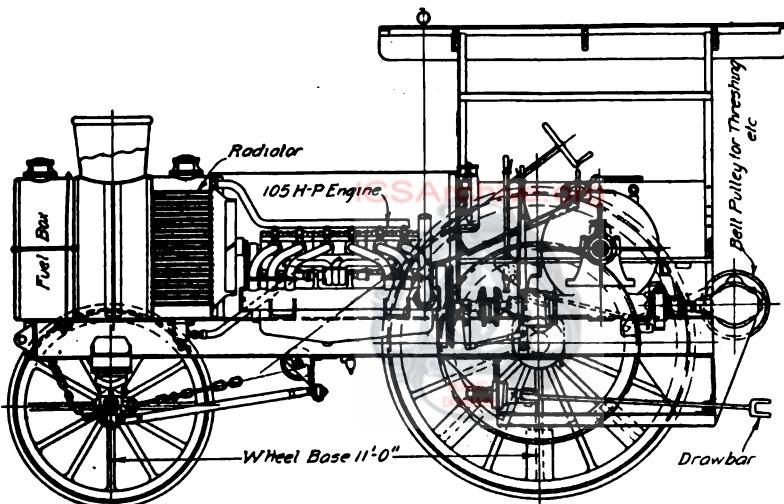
Sectional View of British Daimler 6-Cylinder 105-Horsepower Tractor
